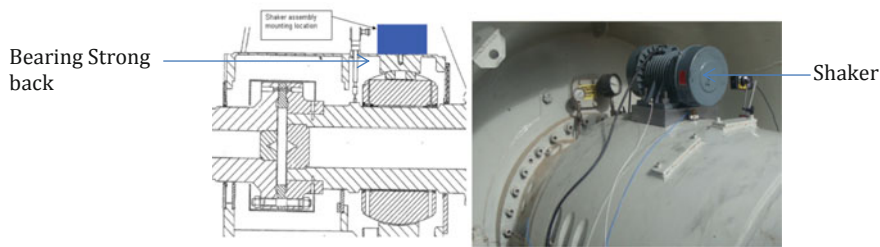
Electrical shaker mounted on an LP bearing strong back (courtesy of Siemens)
